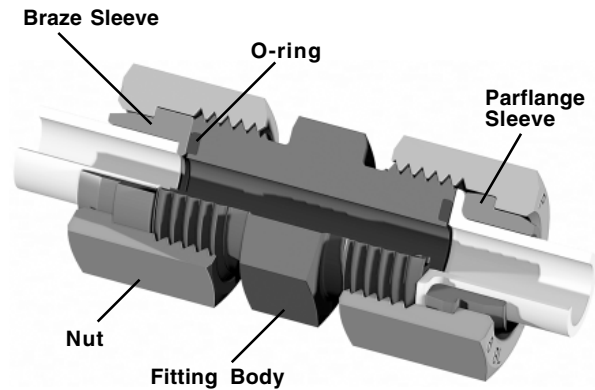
Seal-Lok Union cutaway with flanged and brazed assemblies
